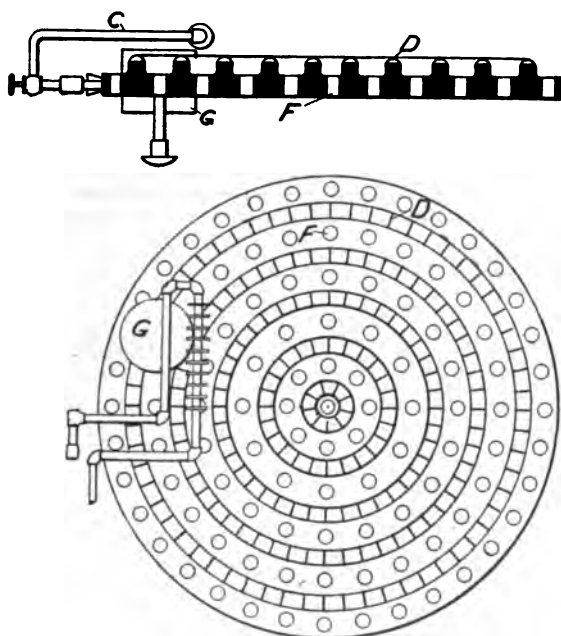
Plan and Sectional Elevation of the White Burner.
